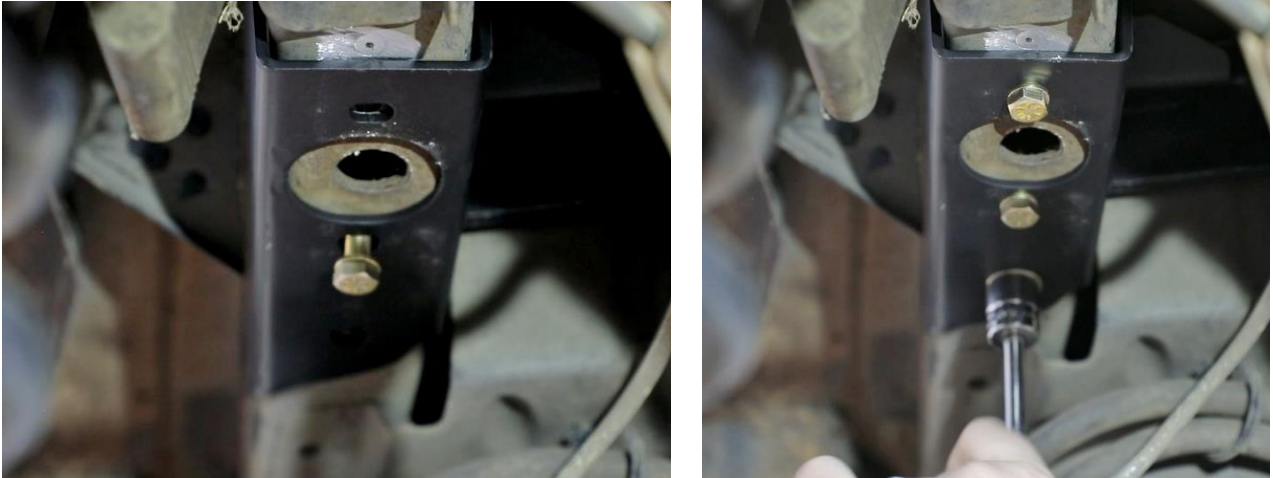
Install Hardware into Weld Nut Plates
